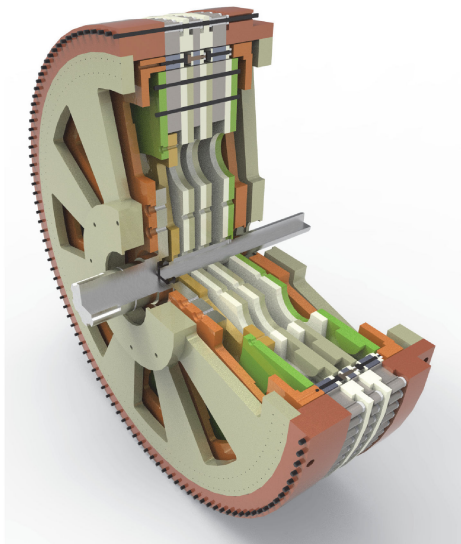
90° cut-away view of the stage 2 MG showing all the interior mechanical components
